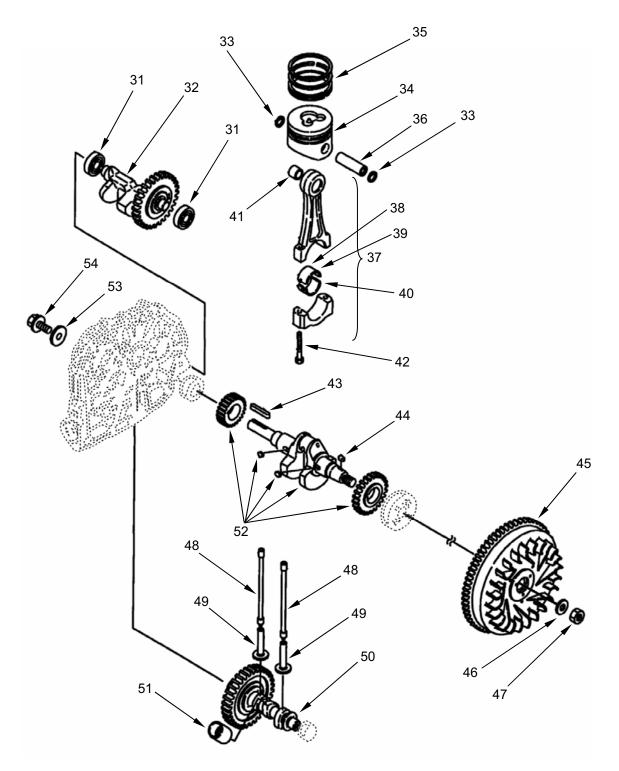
Engine, Diesel (Sheet 3 of 9) (Crankshaft, Piston, and Camshaft).
